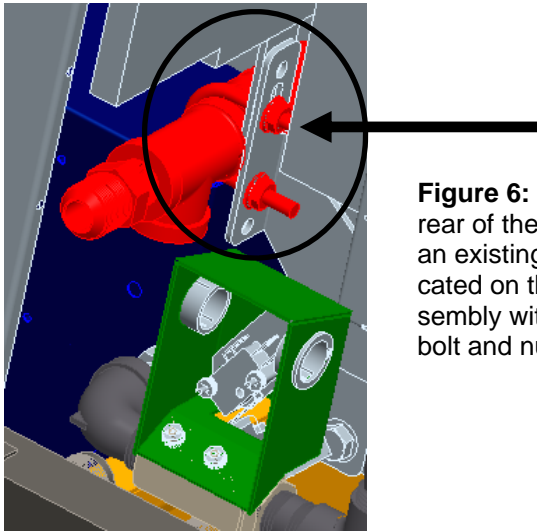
Attach the rear of the assembly to an existing bracket located on the pump assembly with supplied U-bolt and nuts.
